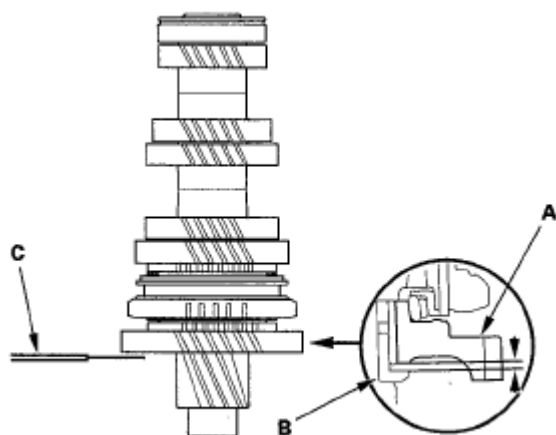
Identifying 1st Gear, Distance Collar And Feeler Gauge
